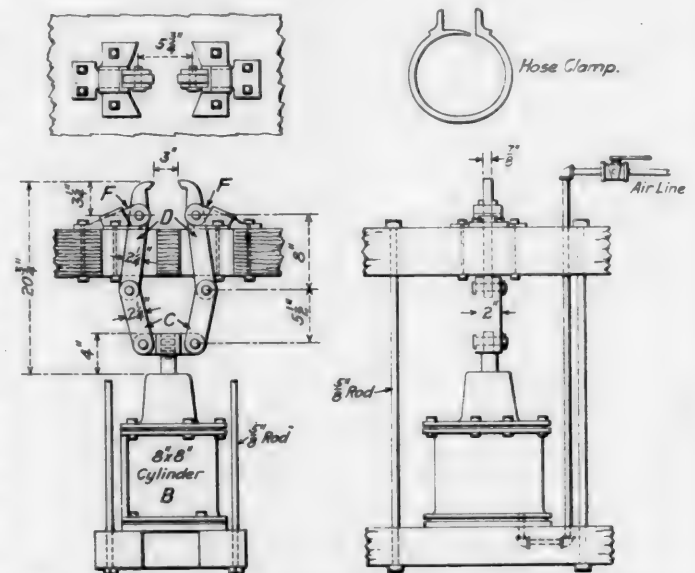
Arrangement for Use in Clamping Air Hose to Coupling
